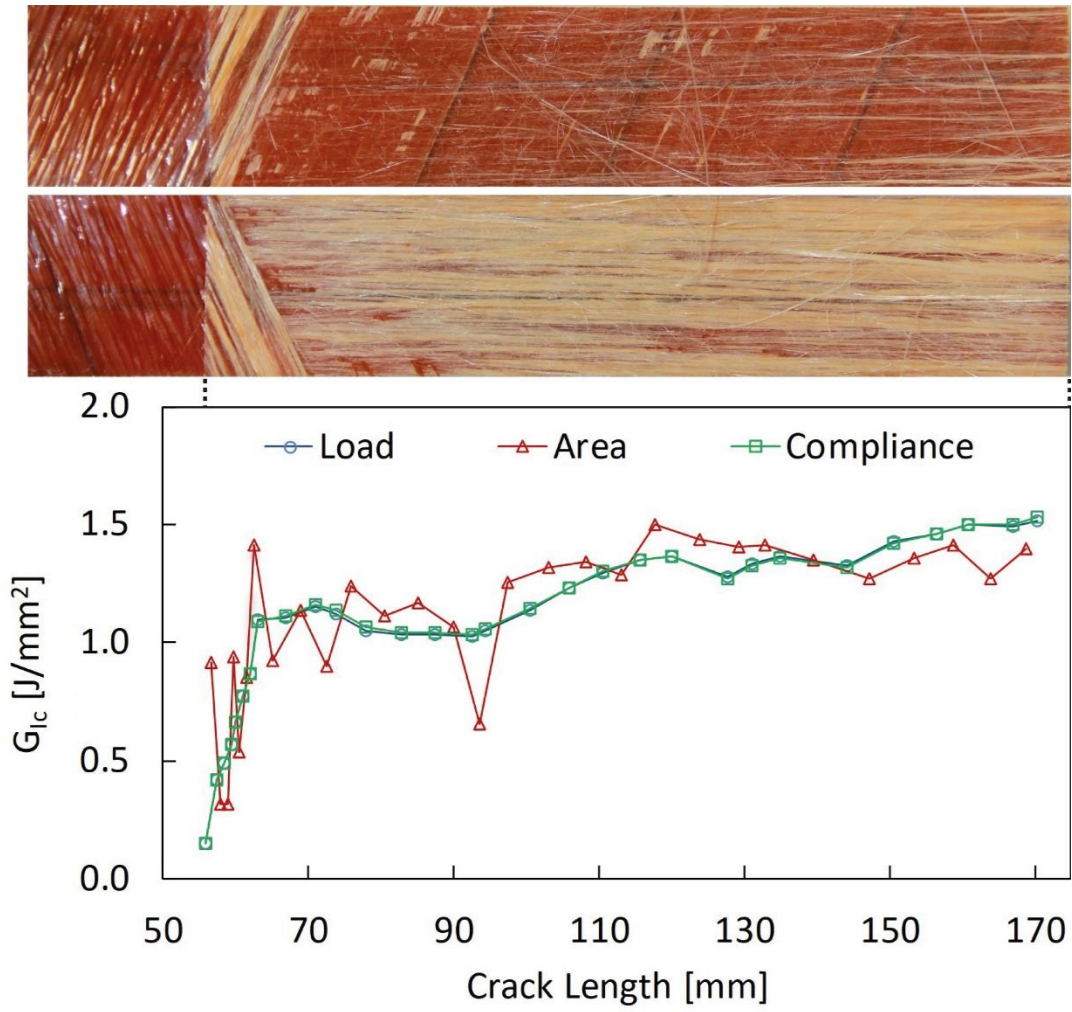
Fracture toughness results and fracture surface of (#1) G-DCB-ENF-65-65-1-MF12060
